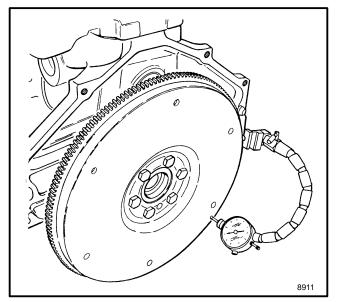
CHECK THE SURFACE OF THE FLYWHEEL
